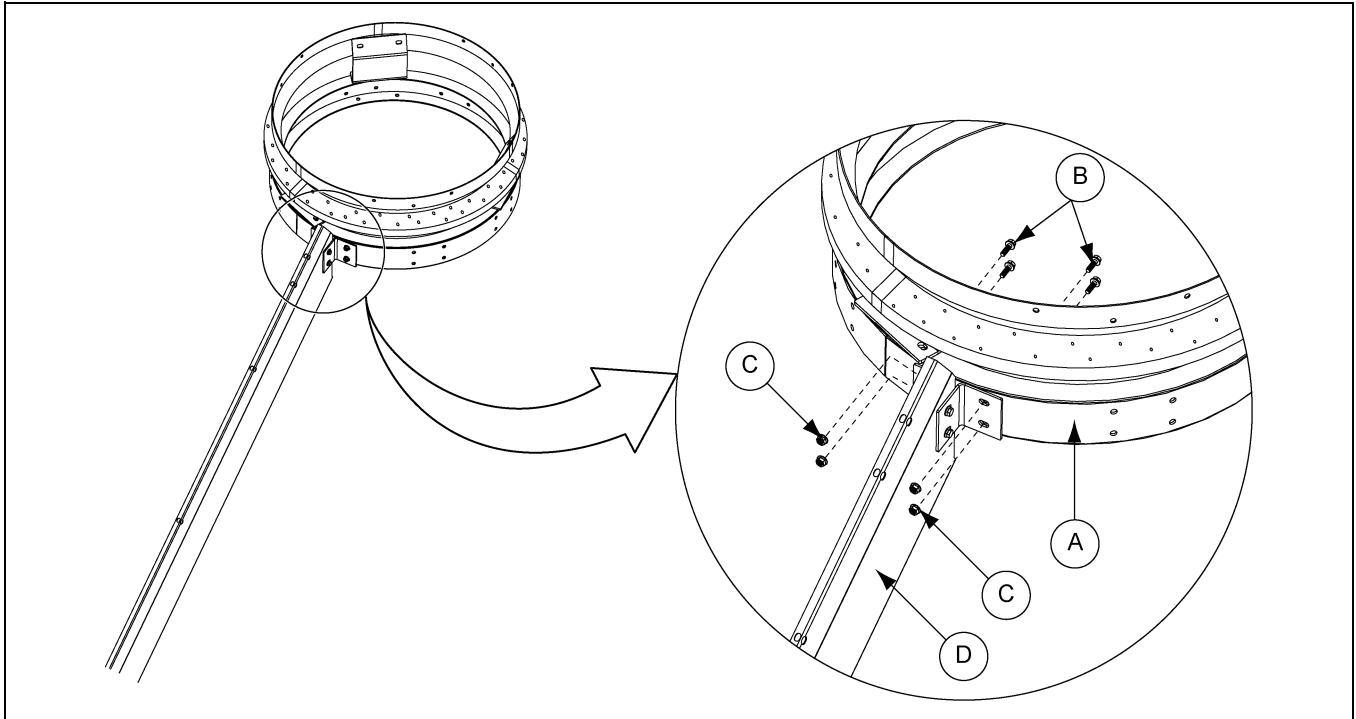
K Install the Rafter Assembly to the Peak Ring Weldment
